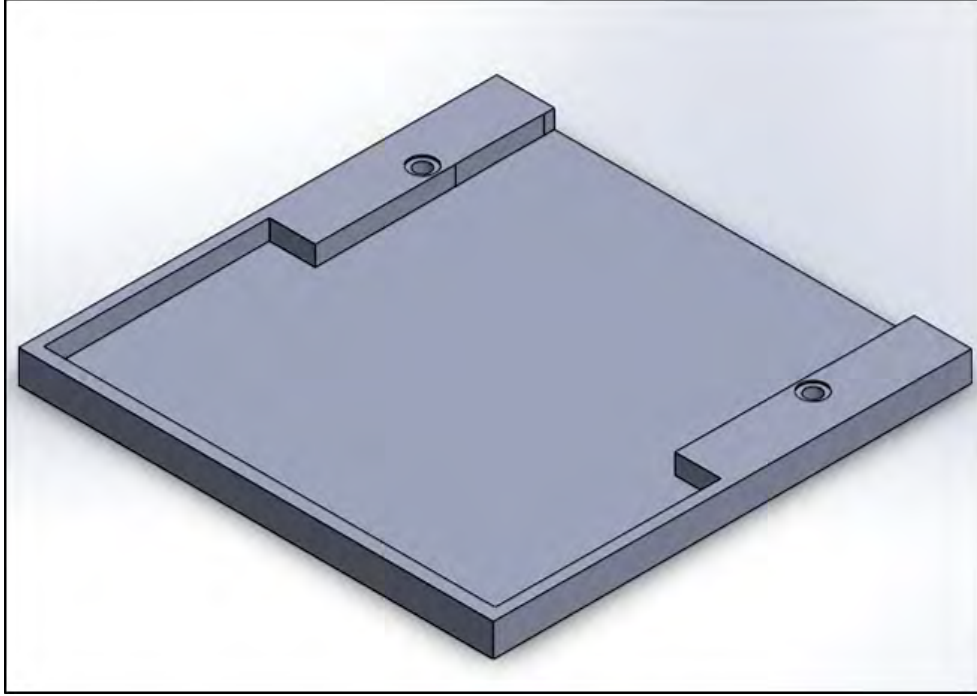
Channel to connect the cylinder and leading edge device. The channel opens at the bottom of the leading edge device to simplify process for removal and replacement of leading edge devices during testing.
